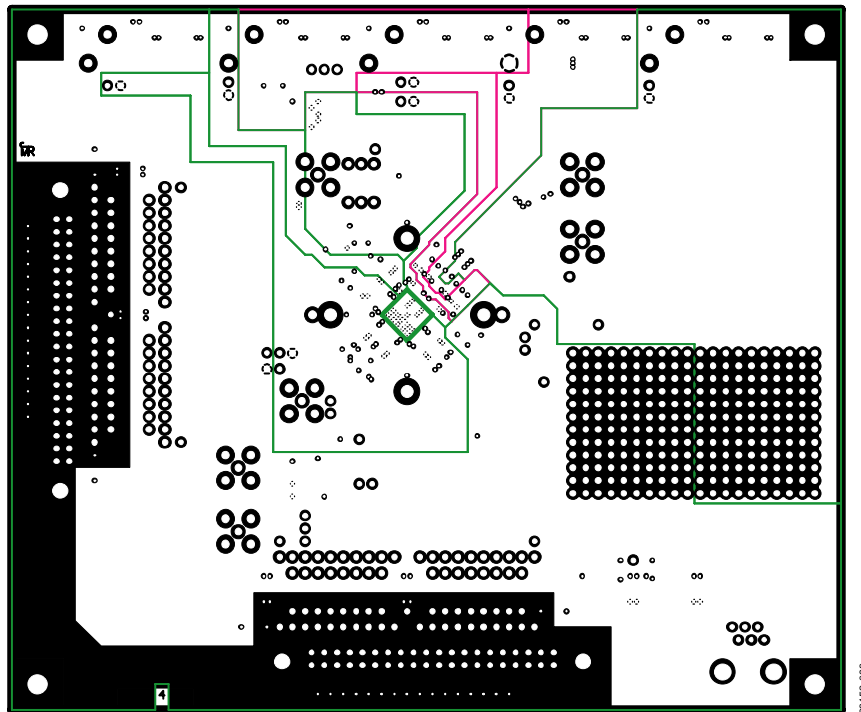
PCB Assembly, Layer 4 Metal (Power Plane), Rev. F Evaluation Board
